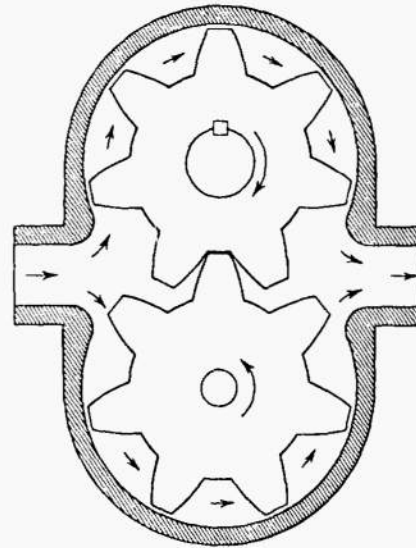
Spur Gear Rotary Hydraulic Pump
